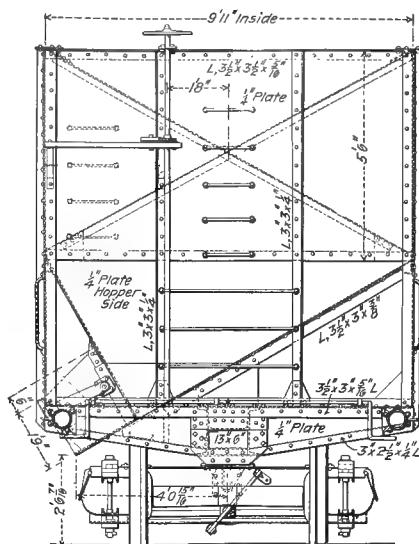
End Elevation of All-Steel 50-Ton Capacity Side Dump Coke Car Shown in Fig. 306.
